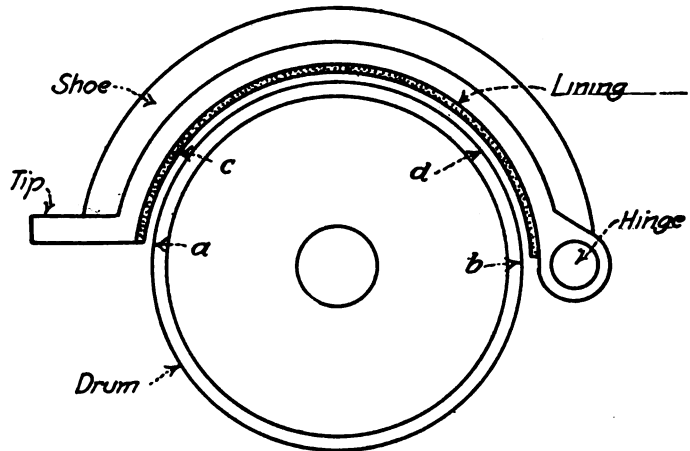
AN EXAMPLE OF FAULTY BRAKE DESIGN
